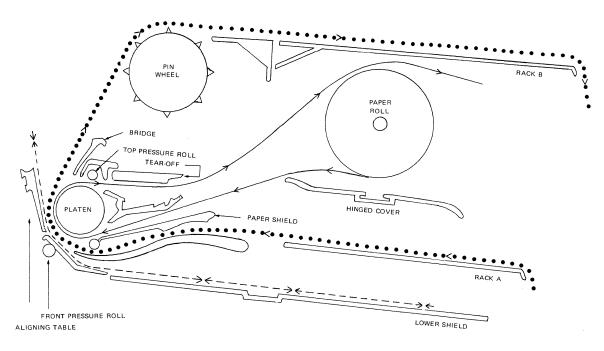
Paths for Front Feed, Roll Journal, and Pin Feed forms, Style 1 Intake and Exit Racks, Basic Front Feed Forms Handlers
